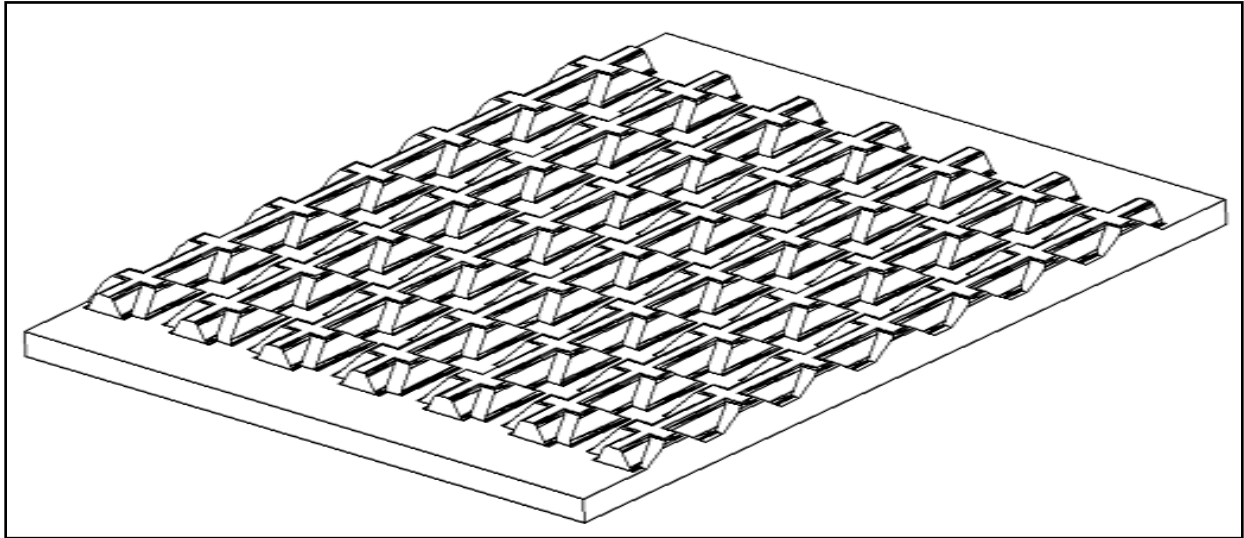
a: Isometric view of the aluminum mold for the small press.
